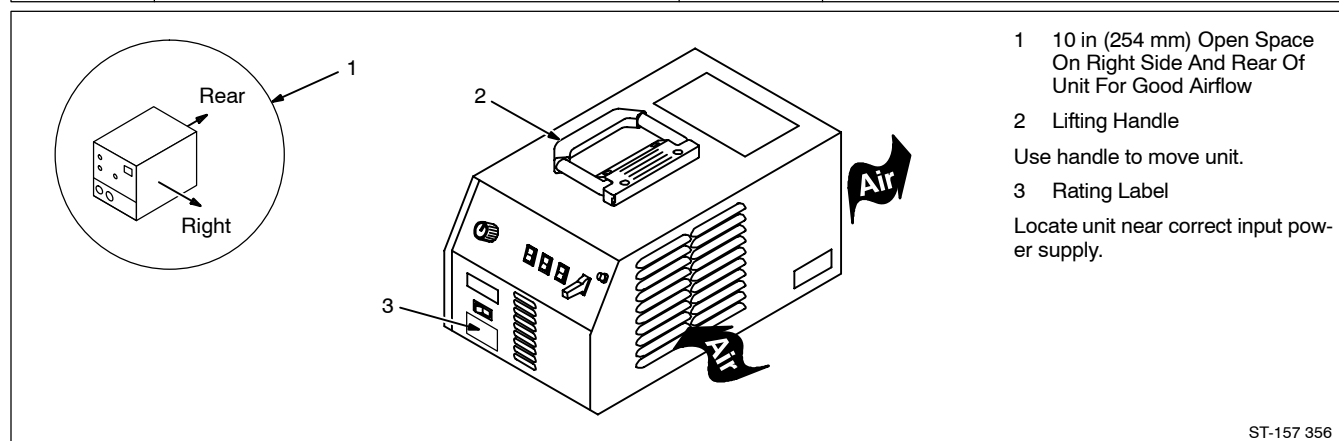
Location And Movement Of Welding Power Source
